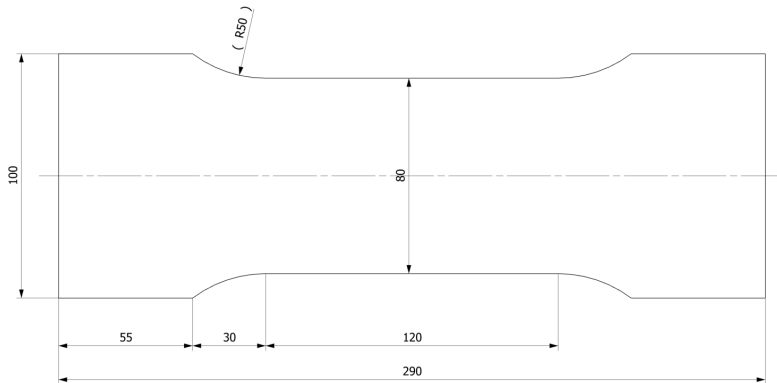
Specimen for DIC tensile testing of sheets with cross welds.
